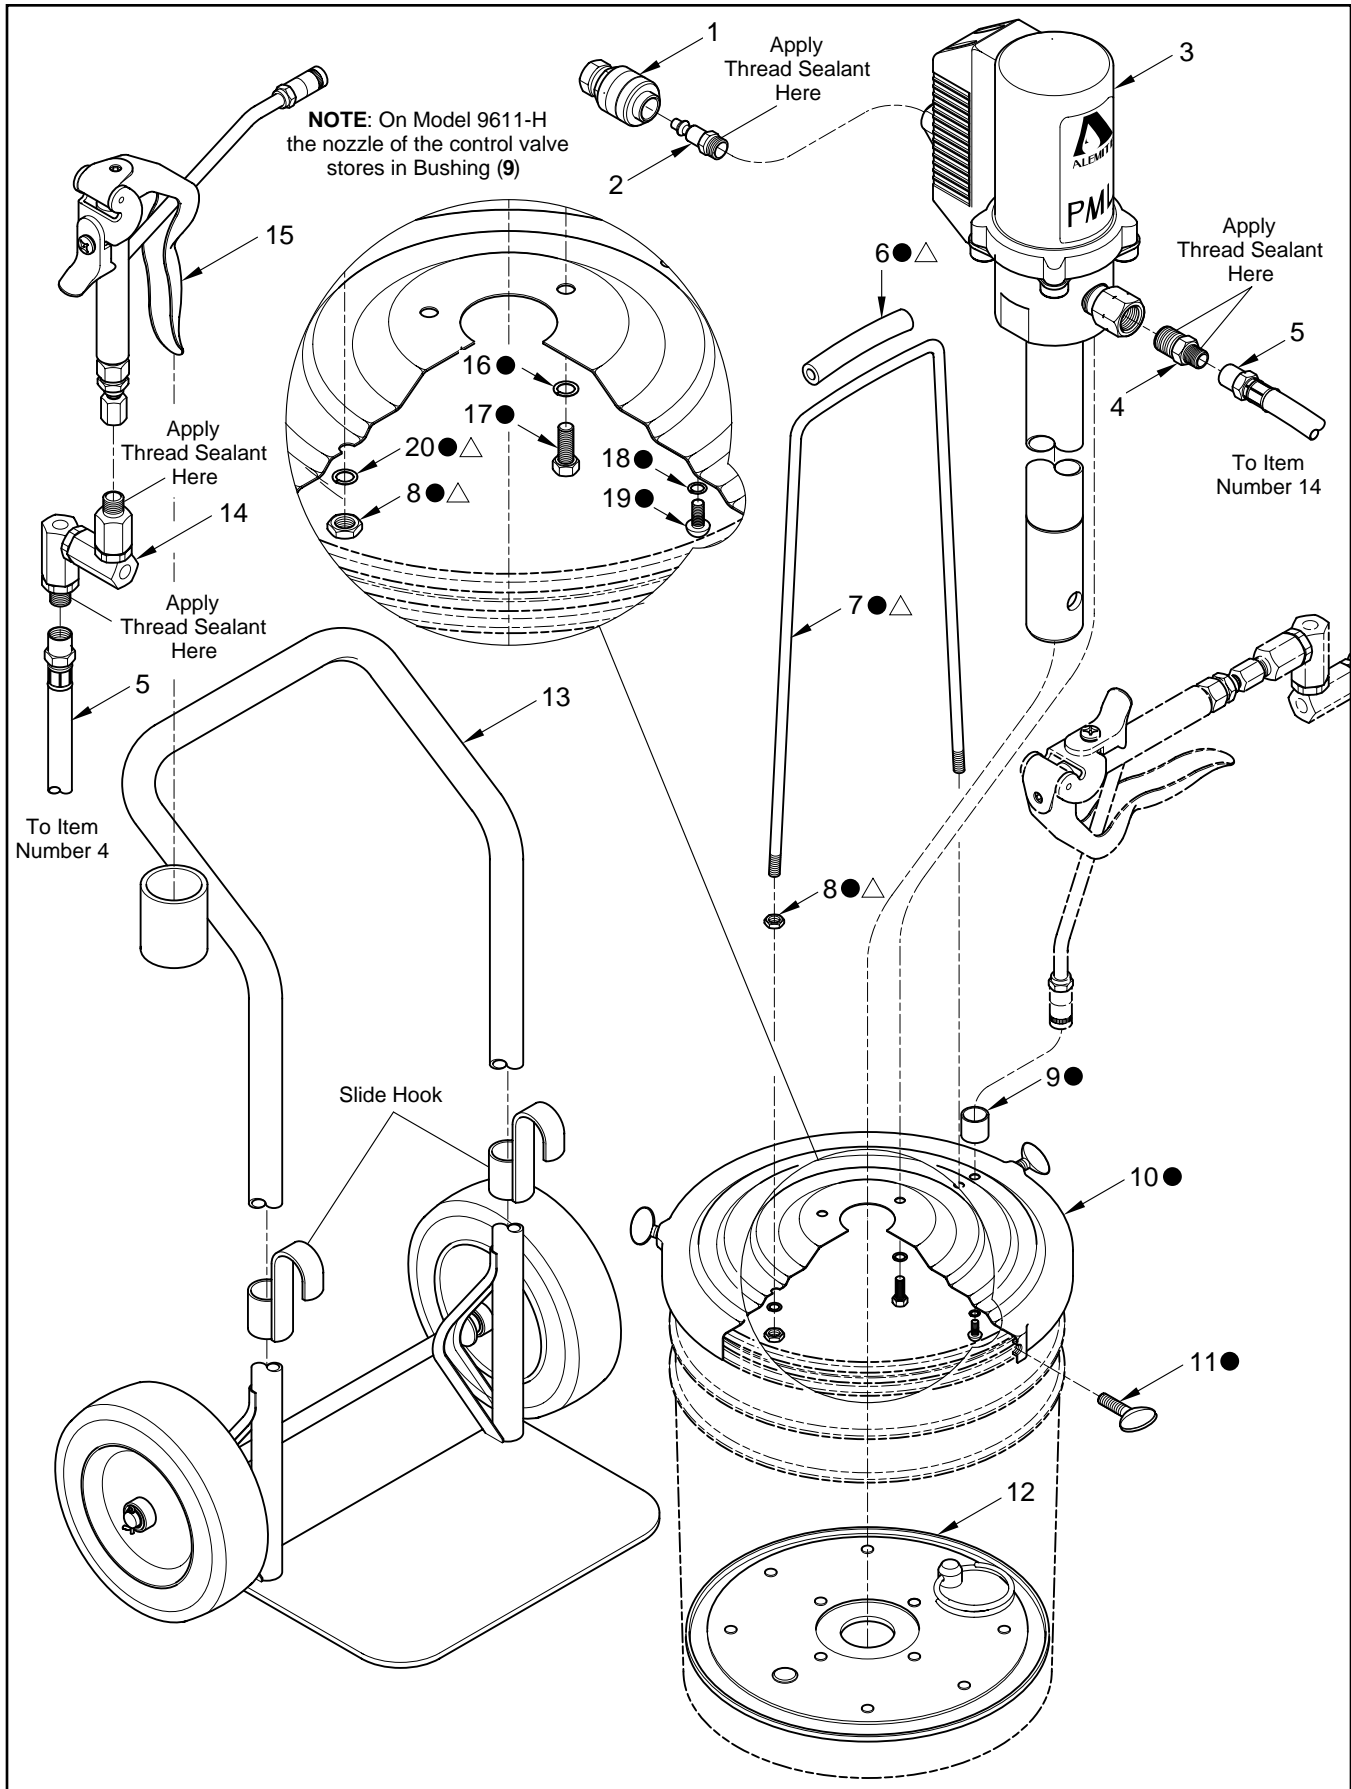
High-Pressure Portable Pump Models 9611-H and 9611-Z - Exploded View
